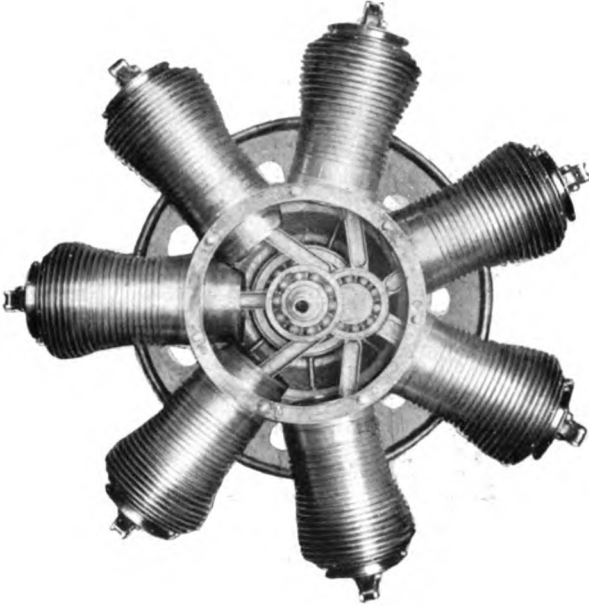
“Gnome” Engine with one end of Crank Chamber removed. Showing Assembly of Connecting Rods and Arrangement of Ball Bearings.
